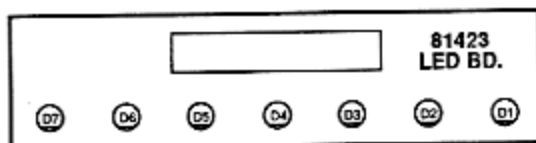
81423 BANDSWITCH LED BOARD COMPONENT LAYOUT
